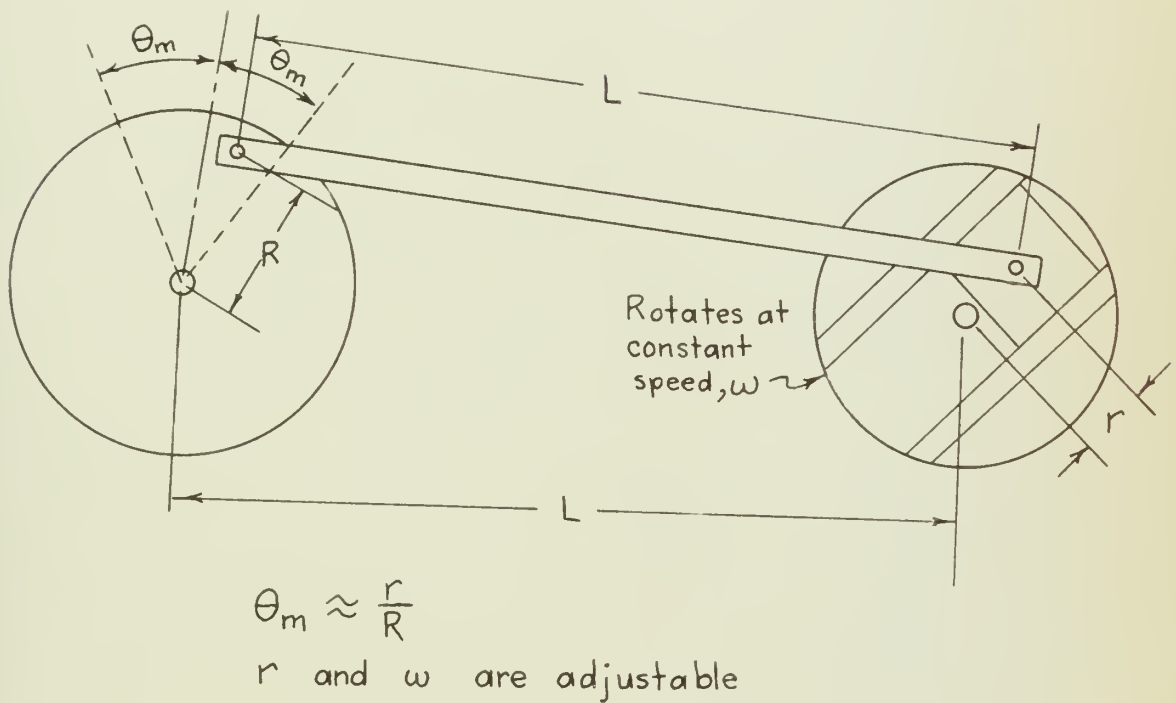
Sinusoidal stroking attachment of sine-drive
